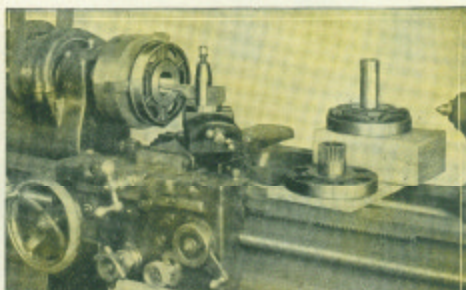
Boring a Transmission Drum to Make a Bushing Repair.
